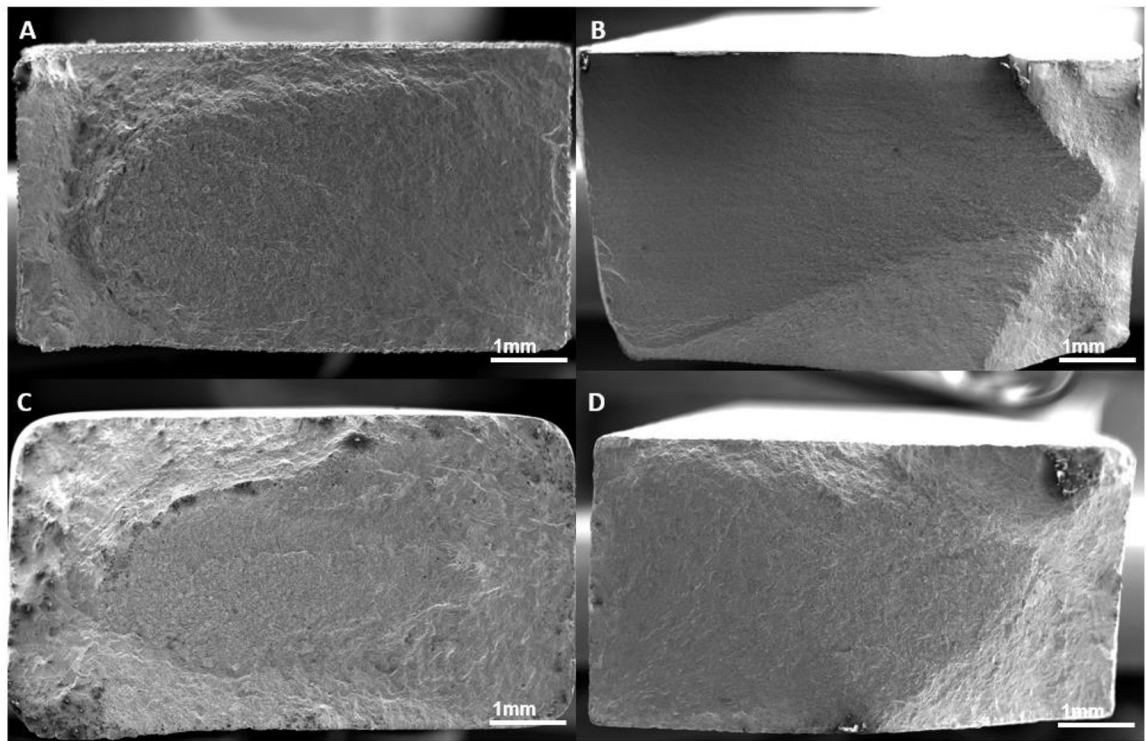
Fracture surfaces of solid high cycle fatigue samples, (A) no treatment, (B) wrought (C) rotopolished, (D) SILC cleaned.
